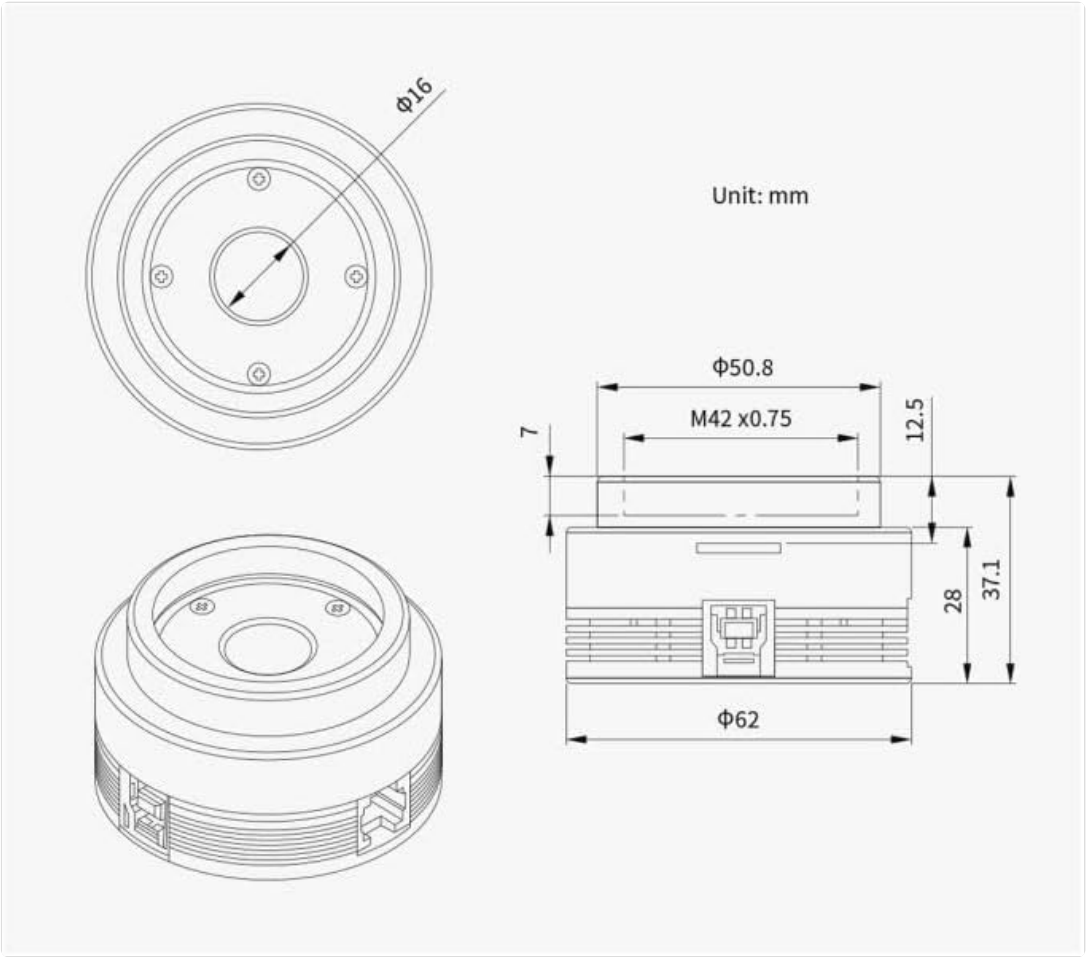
Technical dimensions of the ZWO ASI678MC camera (Unit: mm).
